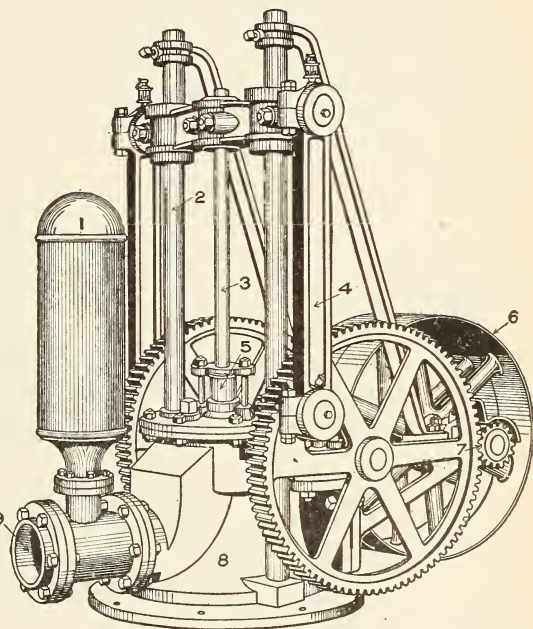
Typical power working-head for deep-well pumps having a 24-inch stroke. 1, Air chamber; 2, crosshead guides; 3, piston rod; 4, connecting rod; 5, packing gland; 6, tight and loose pulleys; 7, gear wheel; 8, base; 9, discharge opening.
